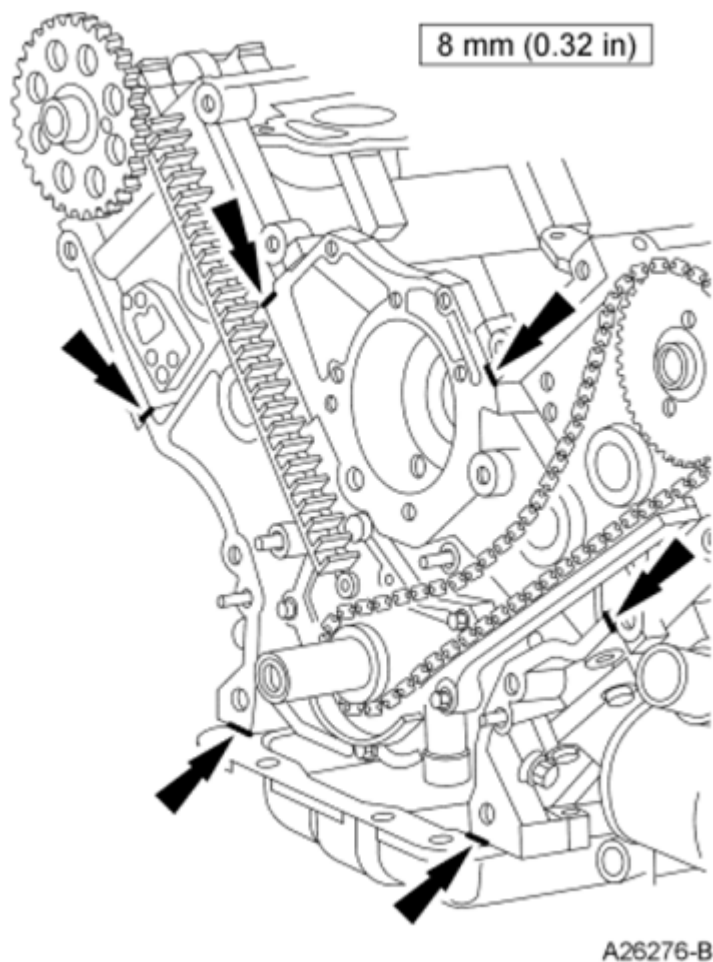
Locating Front Cover-To-Cylinder Block Dowel
